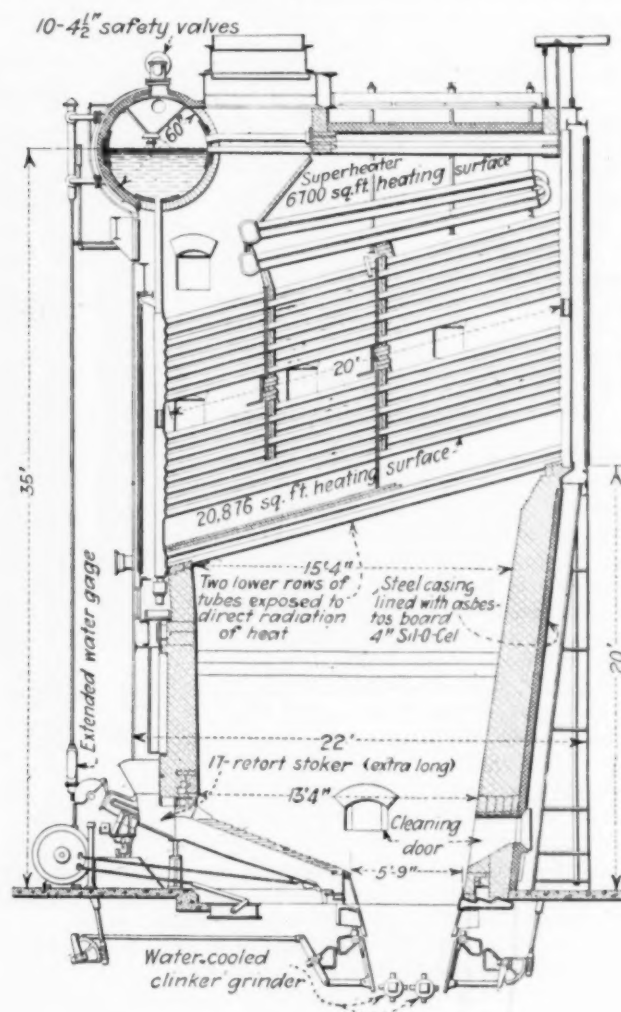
CROSS-SECTION OF BOILER AND SETTING
